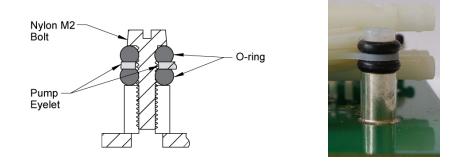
Example of mechanical pump mounting using two O-rings and a nylon box to prevent audible noise
